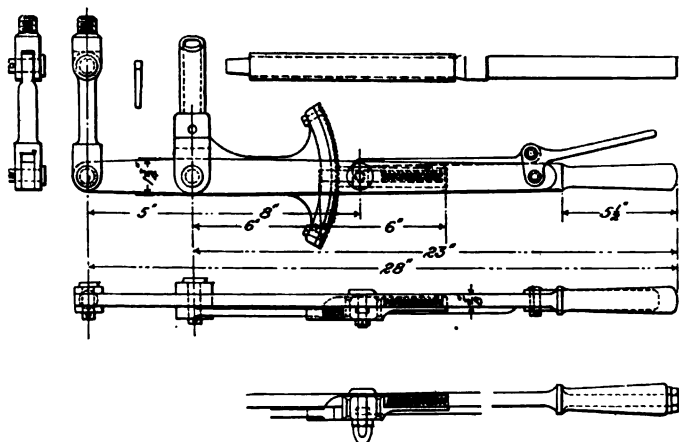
Throttle Lever for Atlantic Type of Locomotive.
